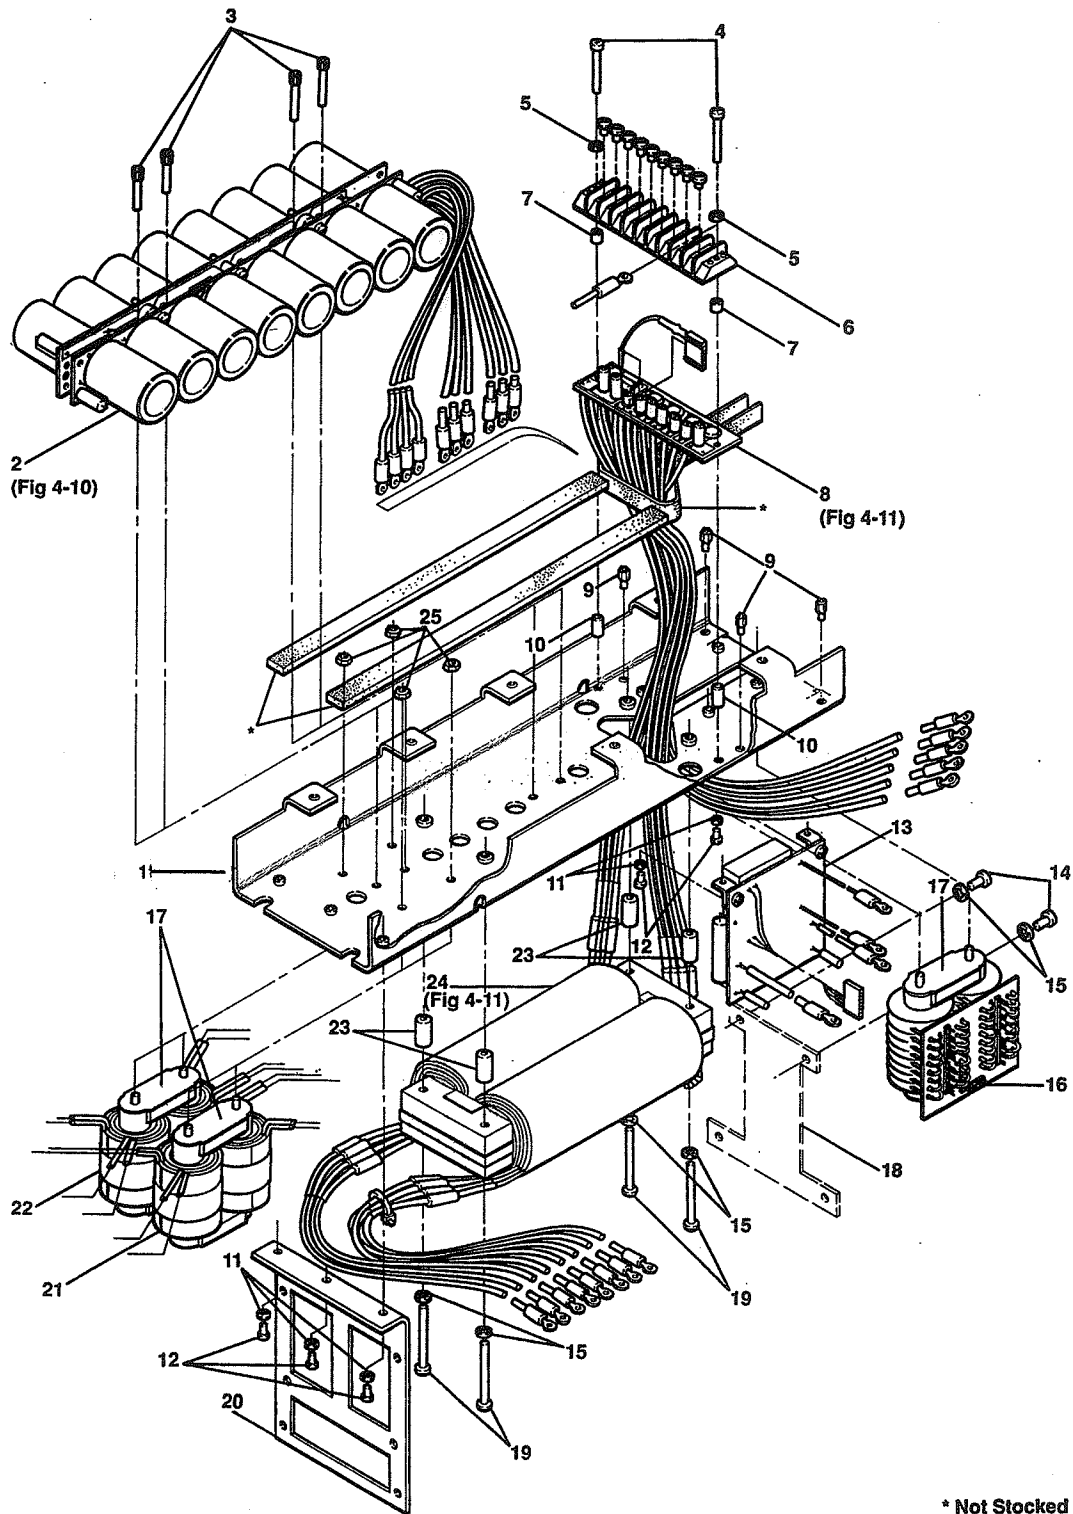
Bracket Assembly, Magnetic Tray - Exploded View
